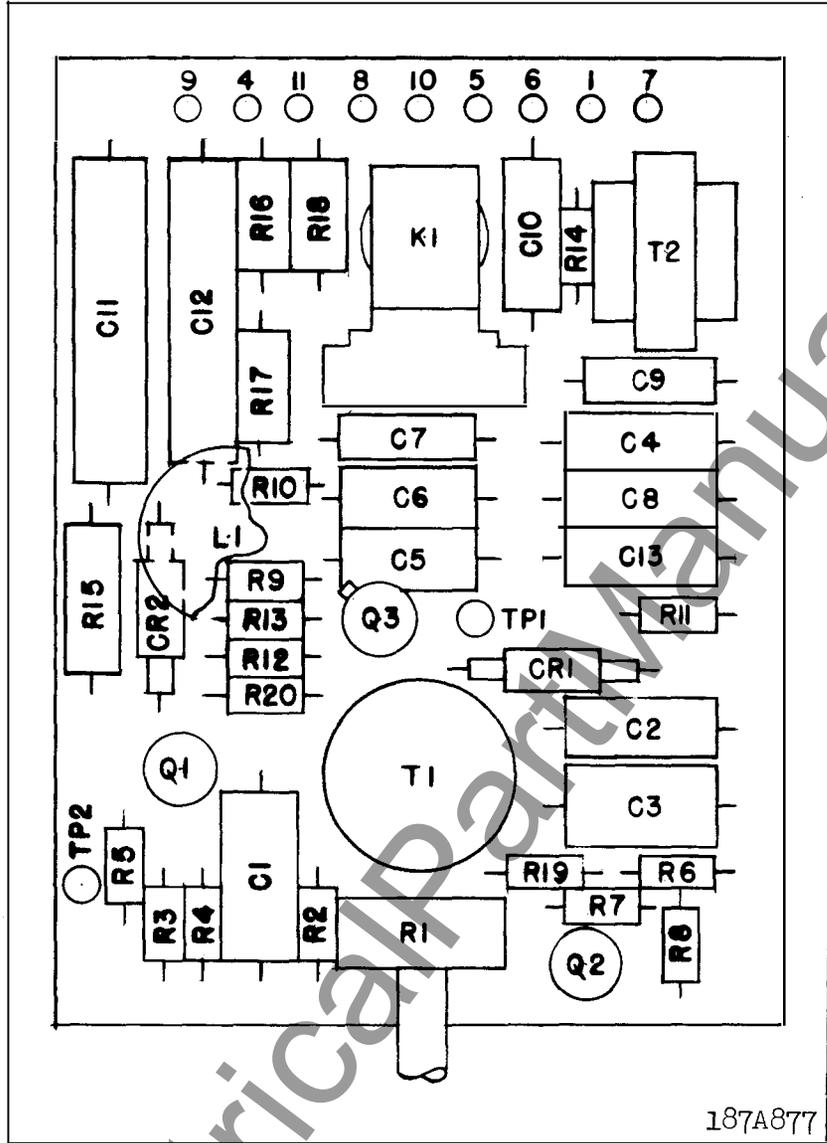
Printed Circuit Board Component Location - Type TC Voice Adapter
